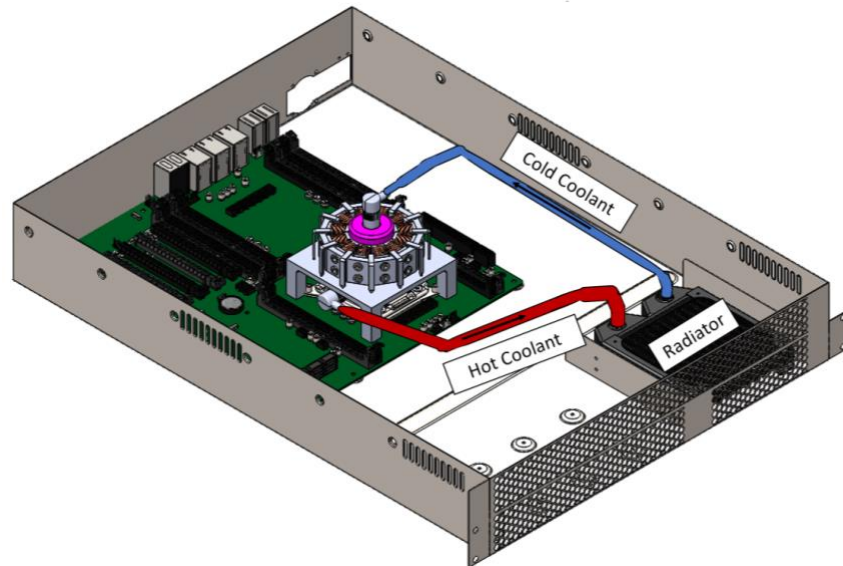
Assembled view of the proposed pump design installed on a motherboard in a server.
